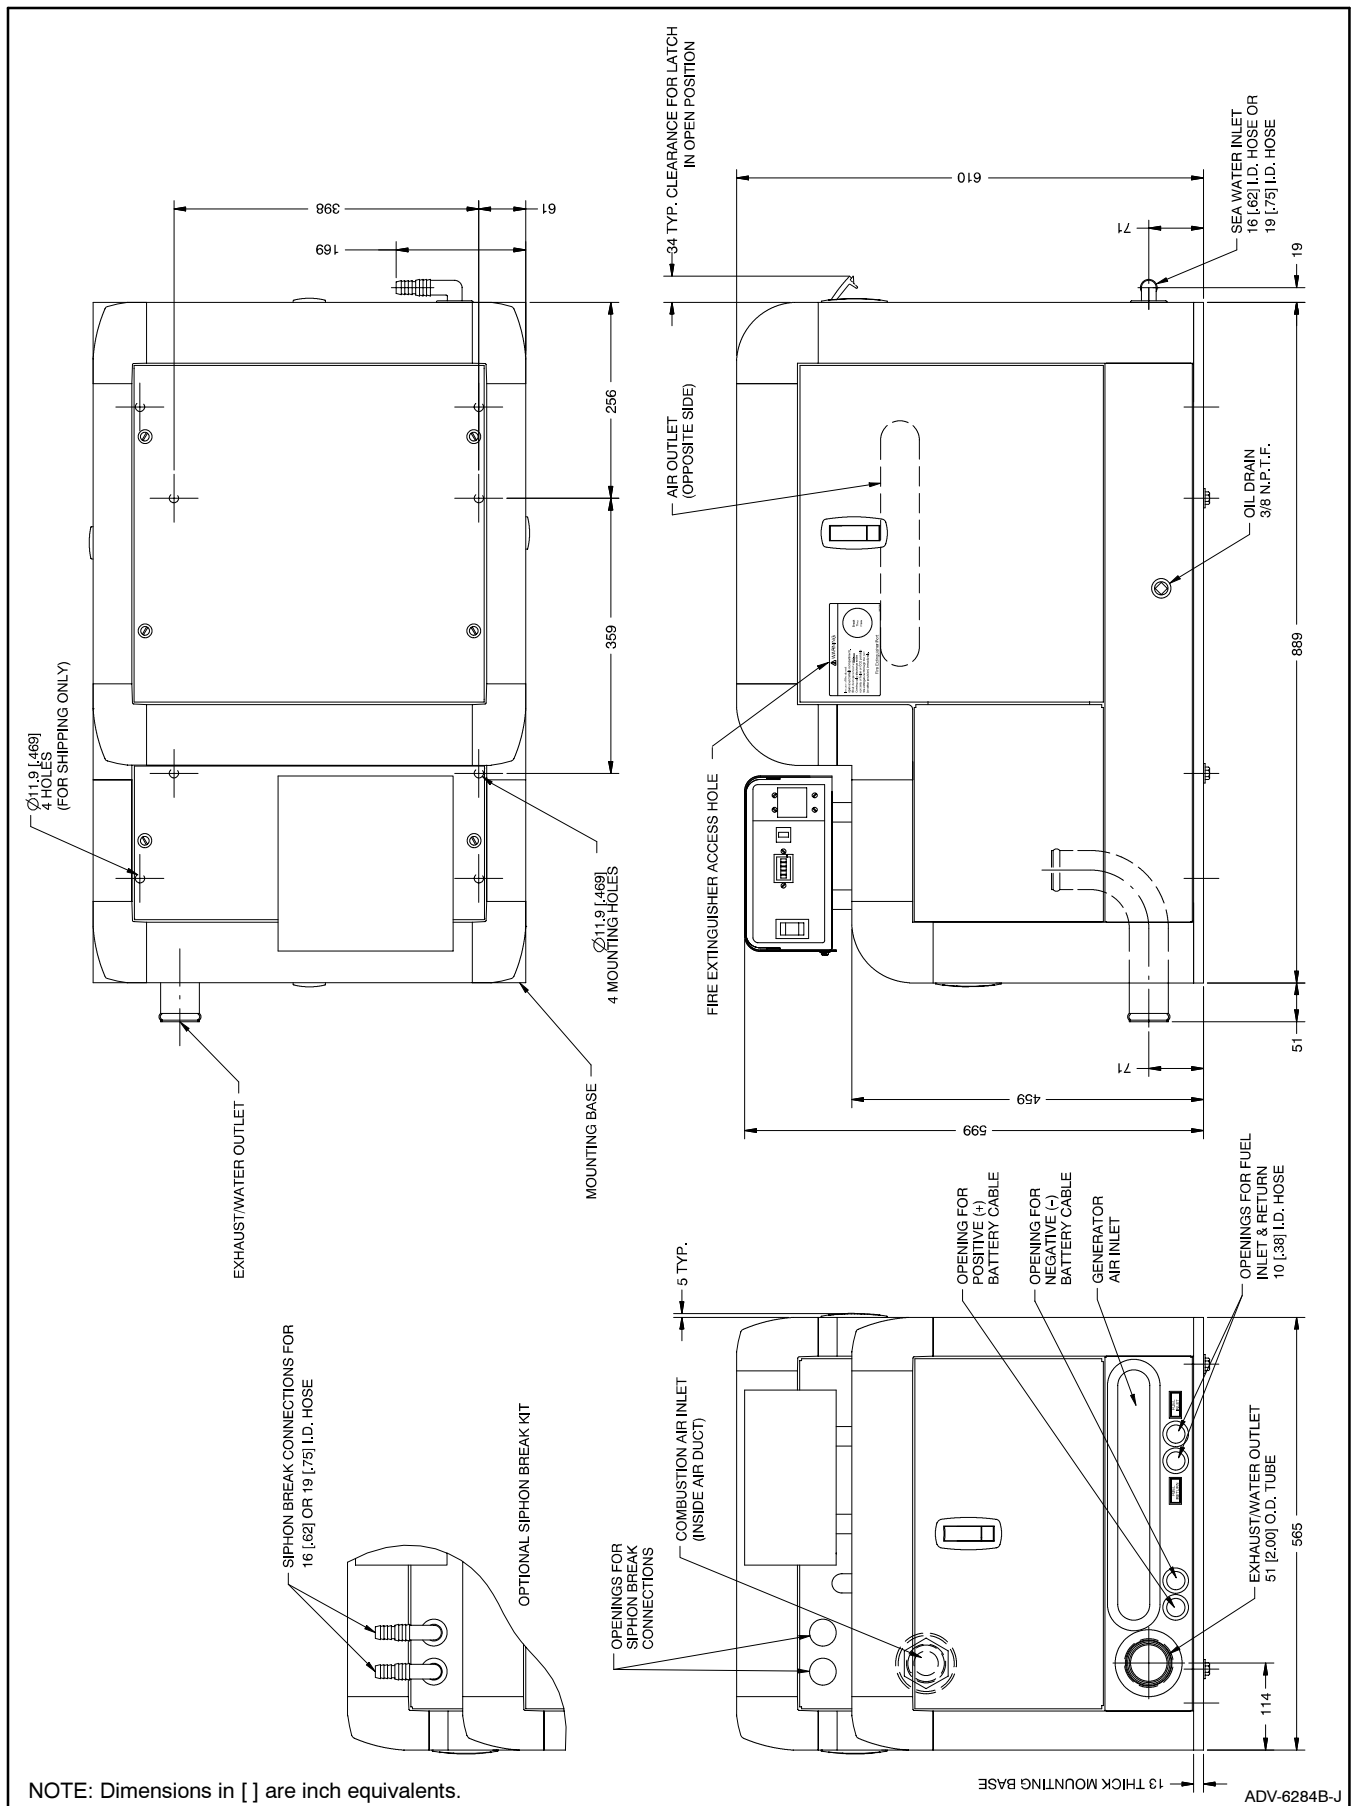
Dimension Drawing, 6.5EFOZ/8EOZ with Sound Shield
